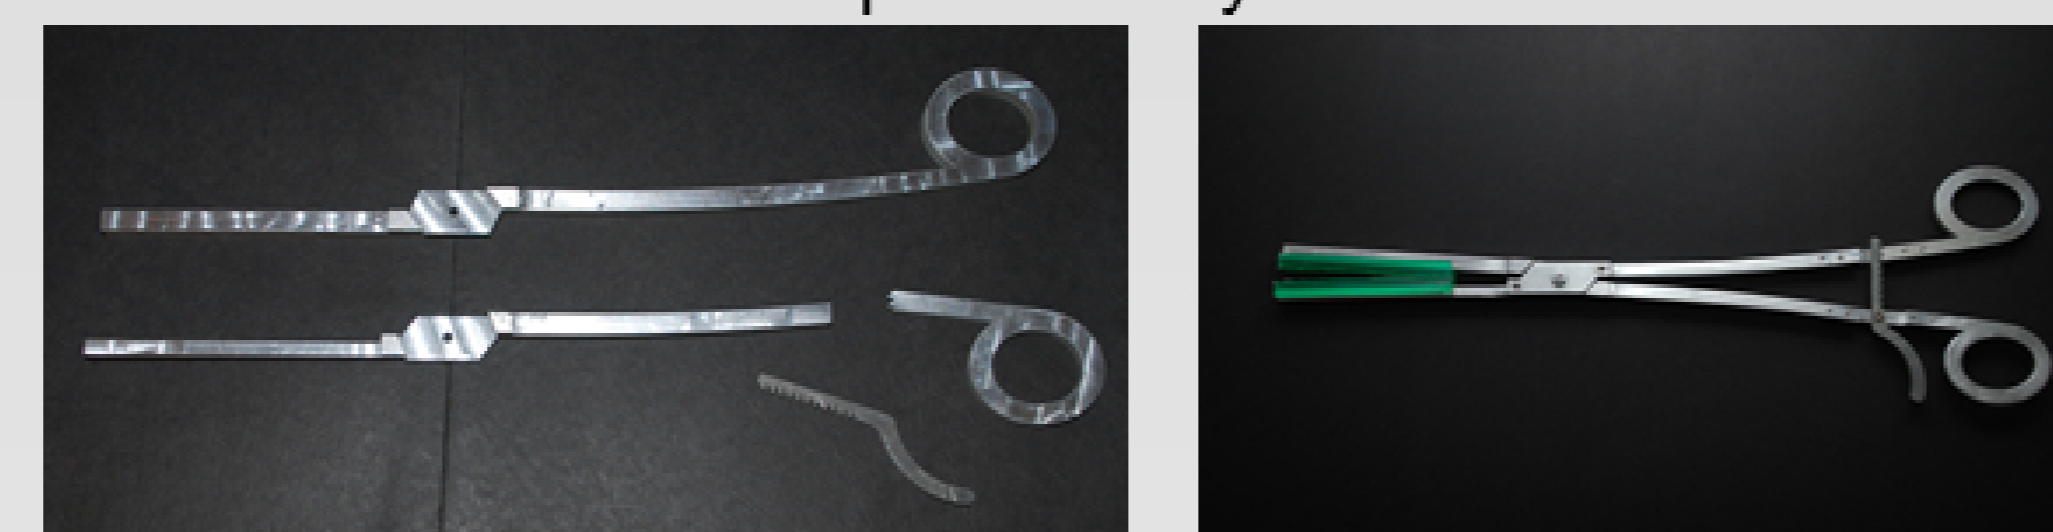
(left) Disassembled clamp; (right) fully assembled clamp (pictured with removable jaw inserts)
